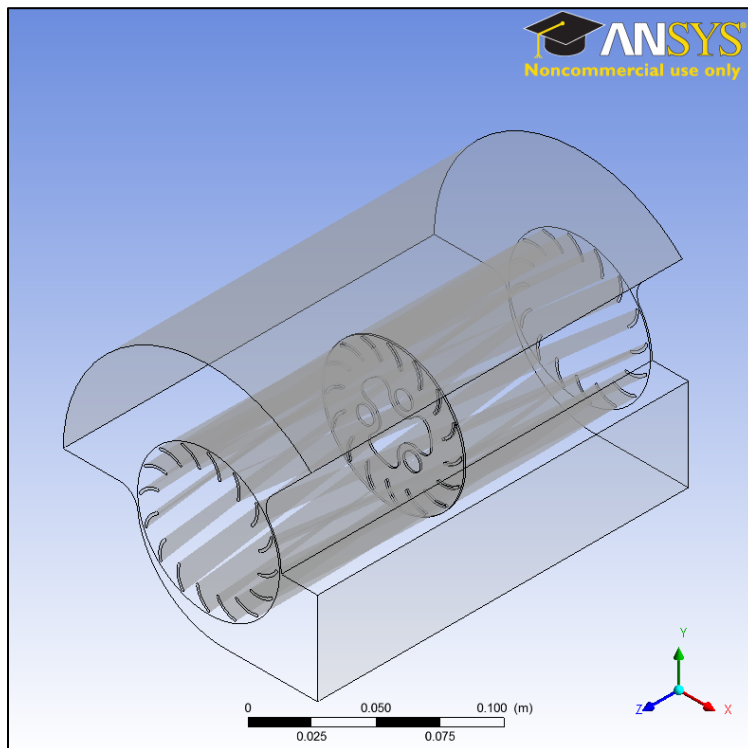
DesignModeler assembly of a helical-bladed CFF within its housing
